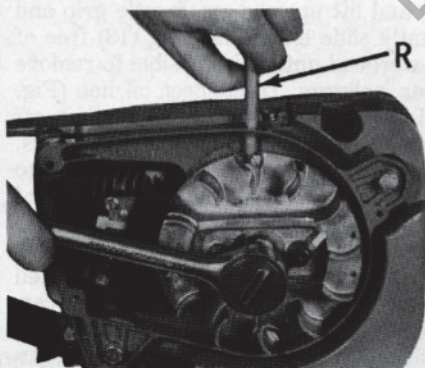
Removal of flywheel or clutch is facilitated by preventing flywheel rotation with a ¼ inch rod stuck through hole in back plate into notch in flywheel.
